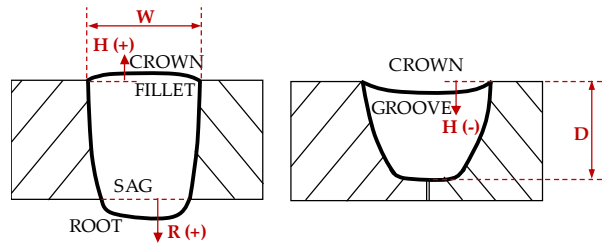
Scheme of the different cross sections of the weld bead.
